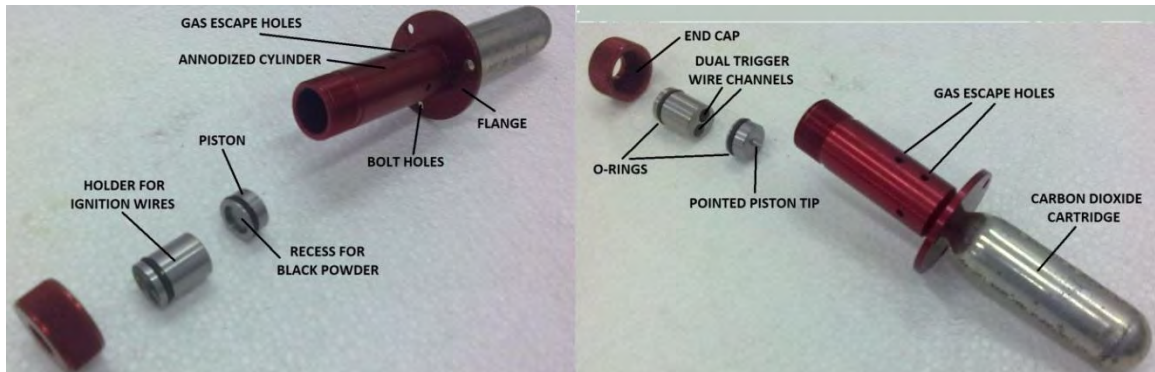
Exploded photograph of the CD3 deployment system with major components labeled.
